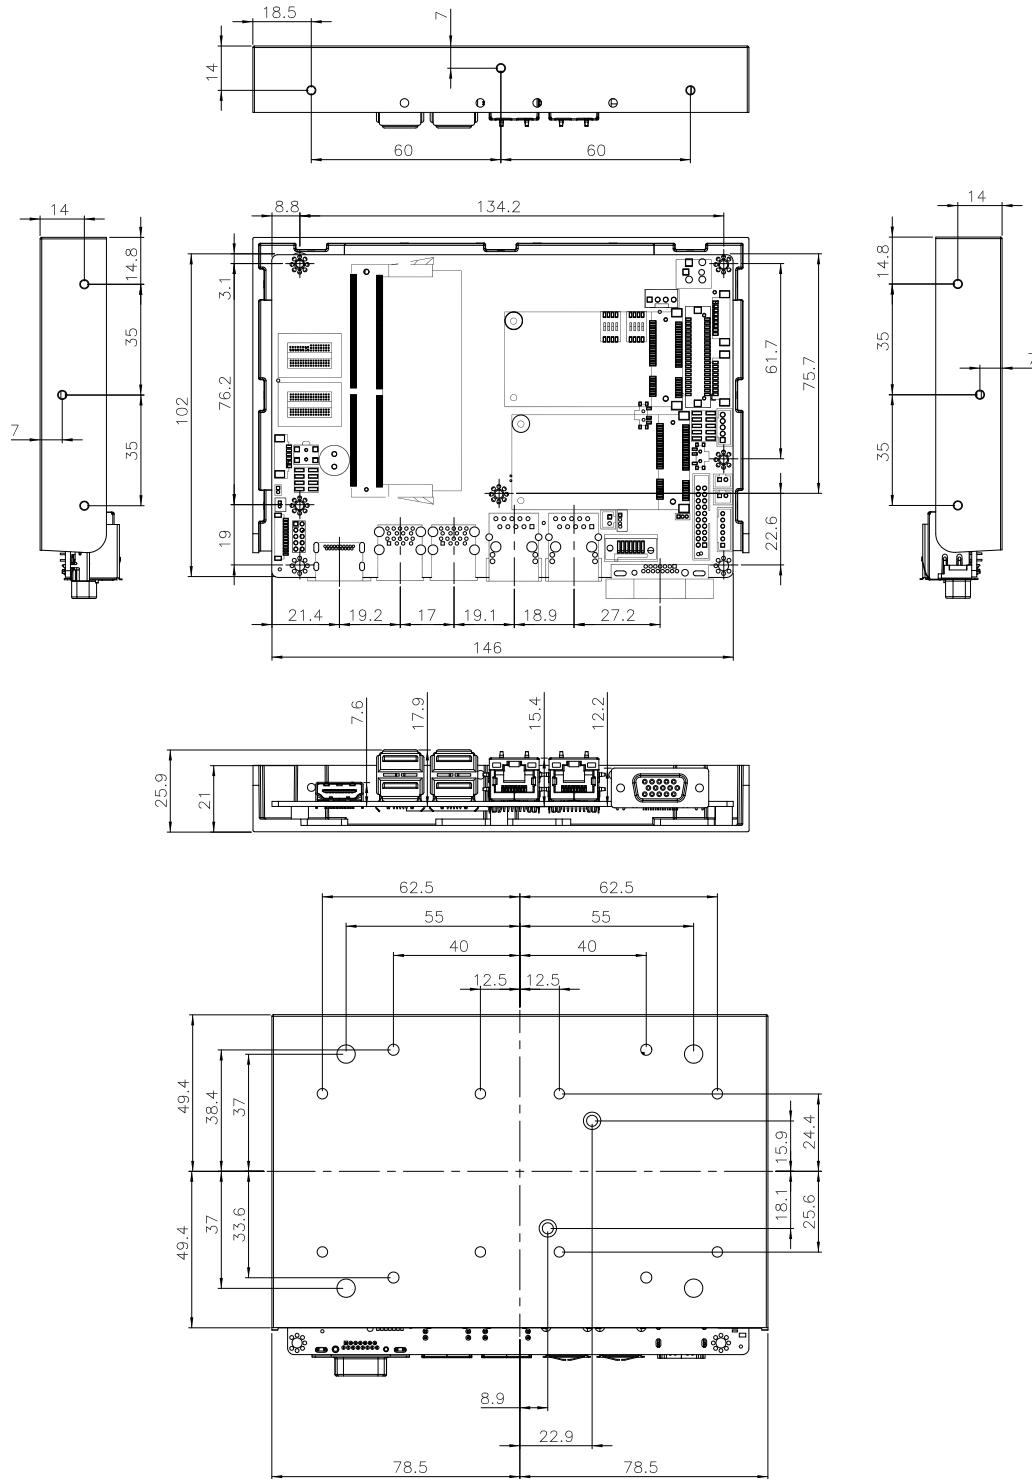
WAFER-ULT3/ULT4 Dimensions (mm)
